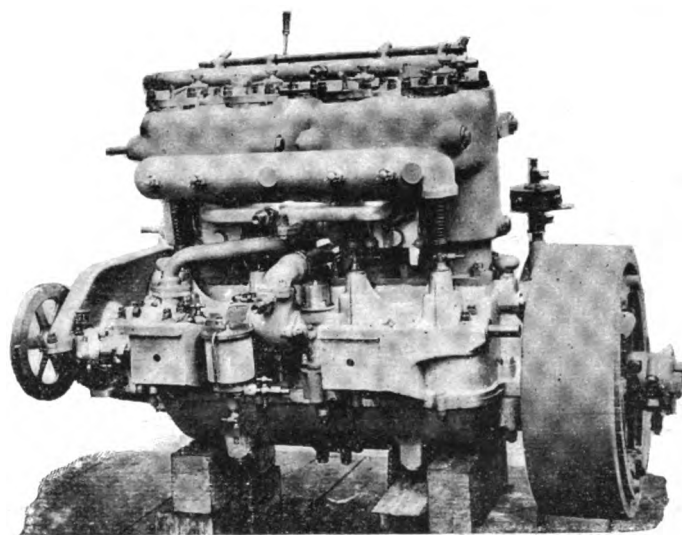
View of "Crossley" Motor—Exhaust Valve Side.
